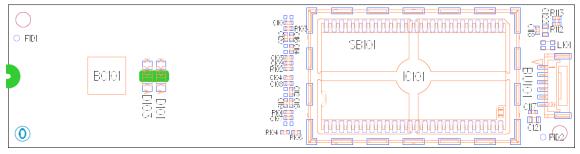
B&R wireless board "RFM-2-NF" front view (component side), L x W = 95 x 24 mm
